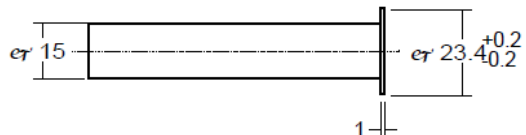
Pipe (dia 15 mm) for flat sealing ring connection for G^{3/4}" external thread
